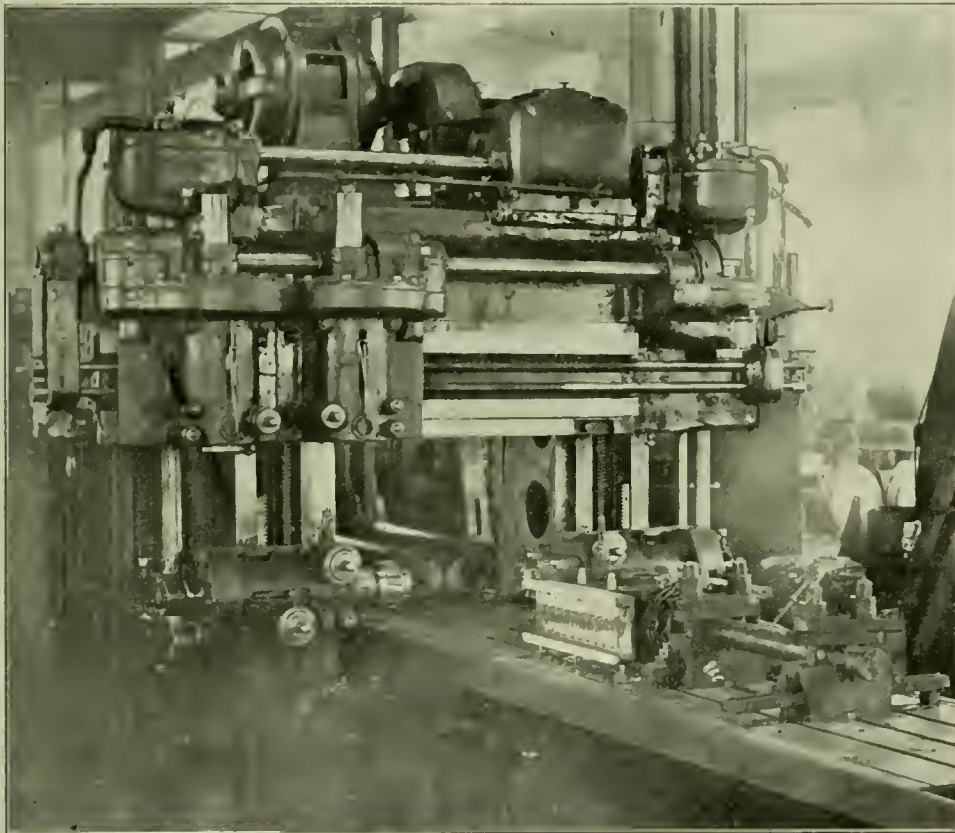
View Showing Set Up for Machining Crosshead Shoes
